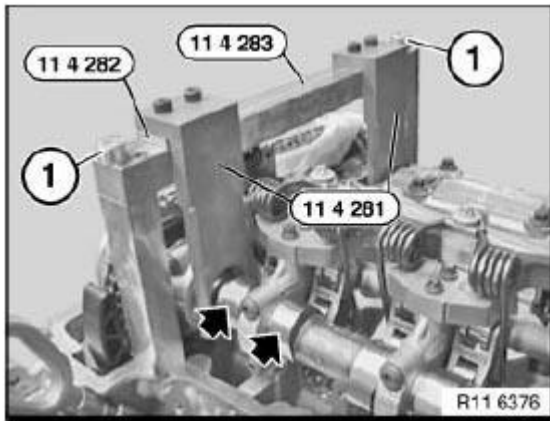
Identifying Cylinder Head Bolts With Special Tools (11 4 282, 11 4 283 And 11 4 281)
